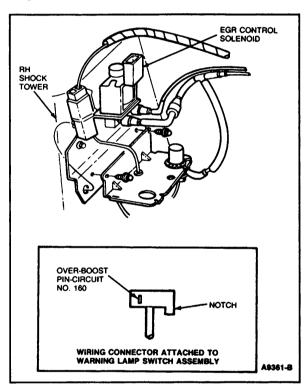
Manifold Pressure Warning Indicator Switch Assembly
